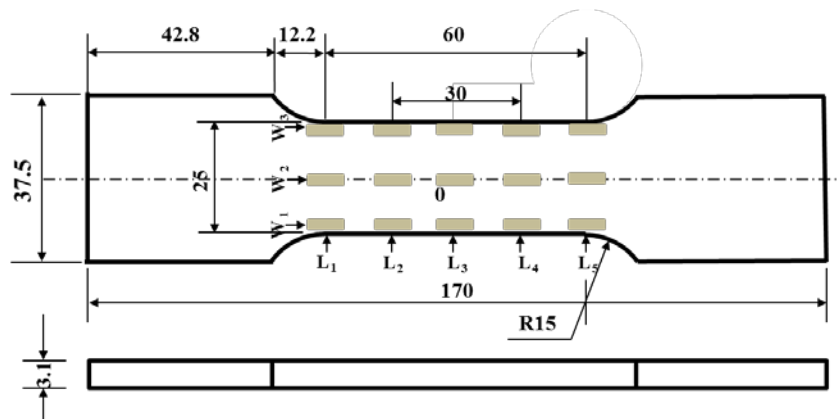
Geometry of sheet specimen of JIS5 and placement positions of strain gauges.
